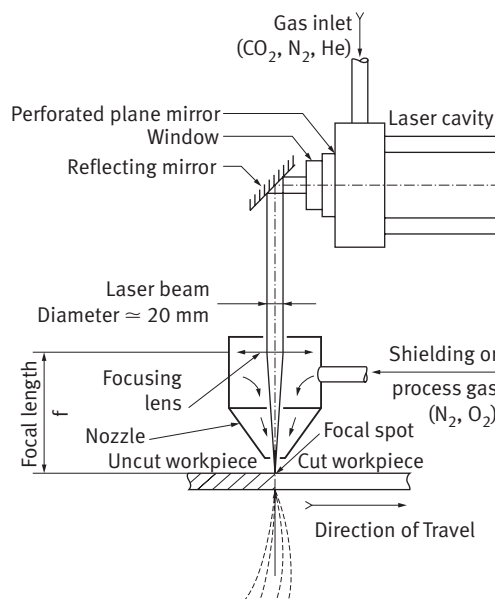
Principle of CO₂ laser beam cutting.
